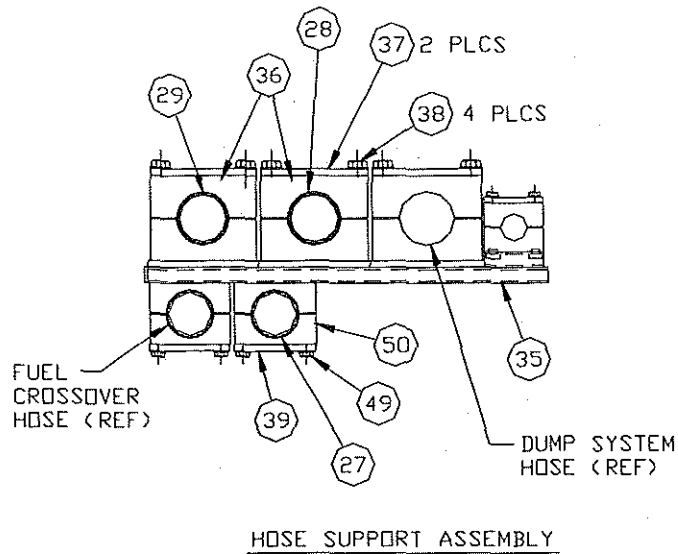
HYDRAULIC PUMP DRIVE ASSEMBLY (A85186, SHEET 3 OF 3)
